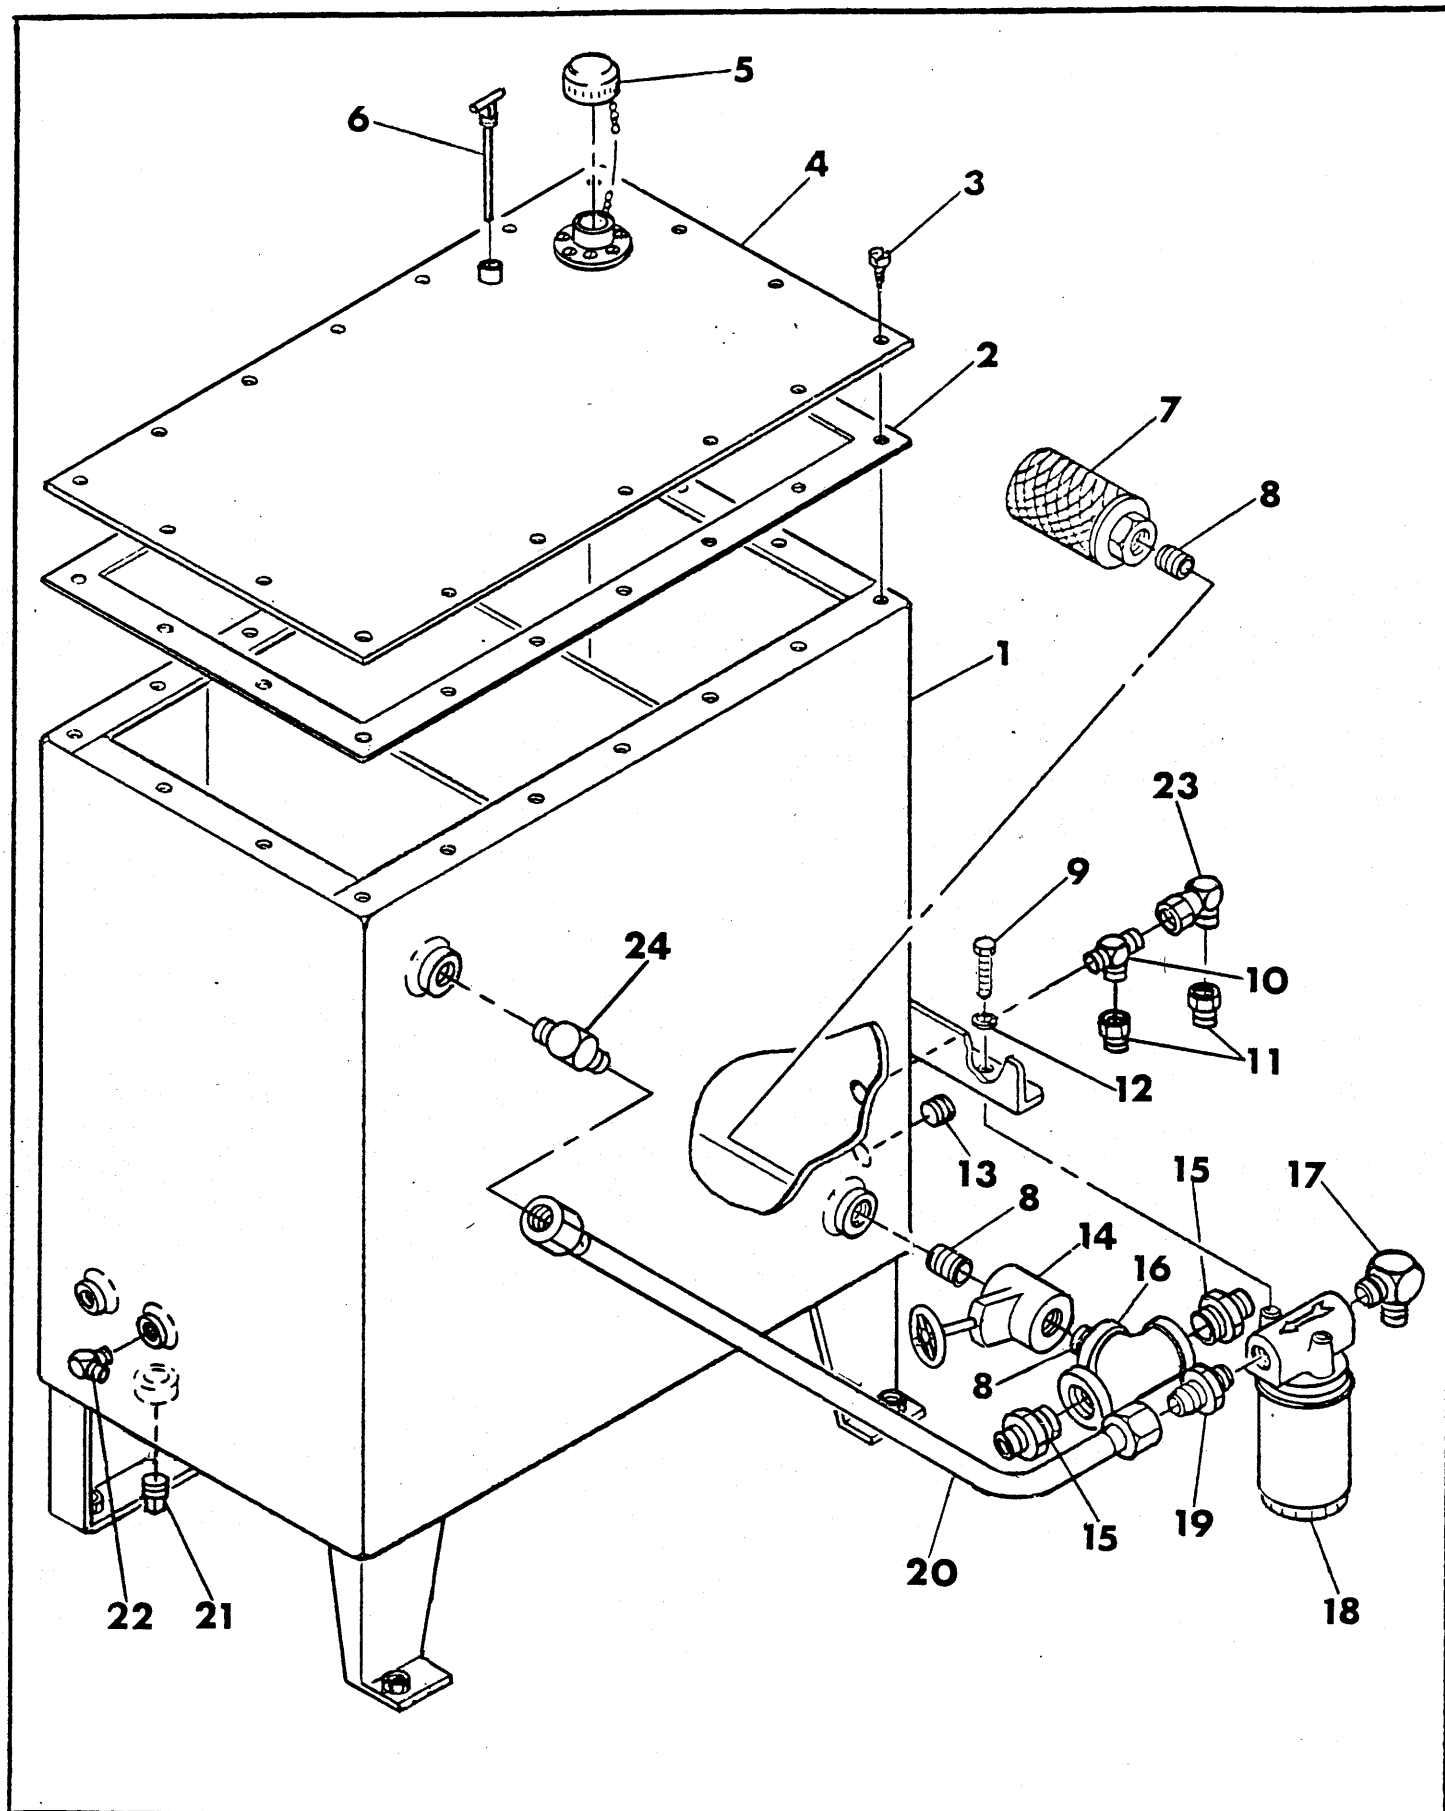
HYDRAULIC TANK ASSEMBLY (ALL MODELS)
